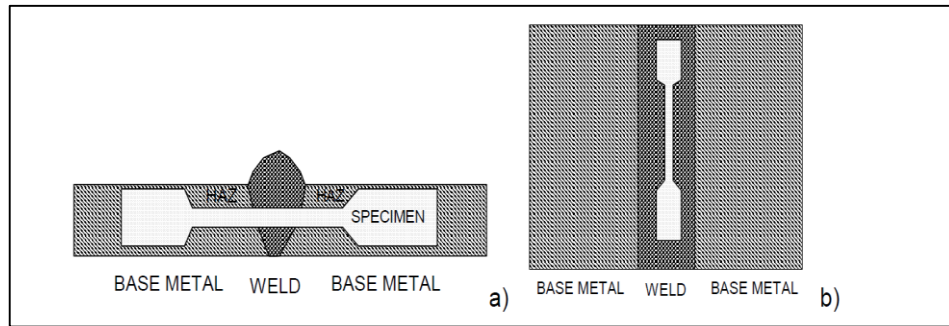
Schematic diagram of tensile specimens from 1) transverse section of weld joints and 2) all weld specimen.
